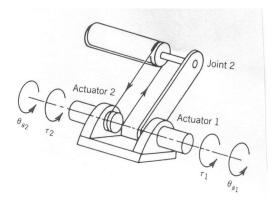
Two-link revolute joint arm with remotely driven link.
